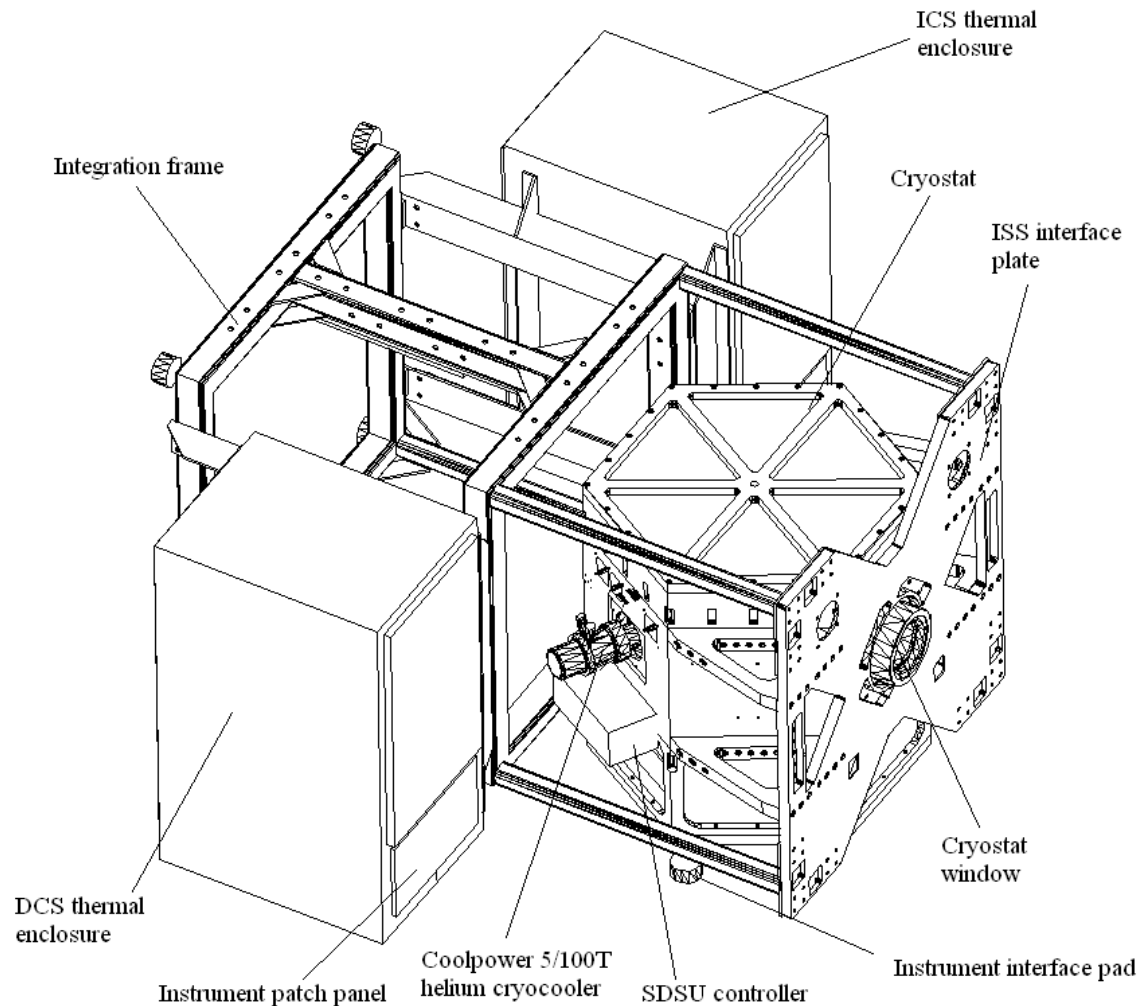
Complete GSAOI assembly ready for attachment to a side-looking port of the ISS.
